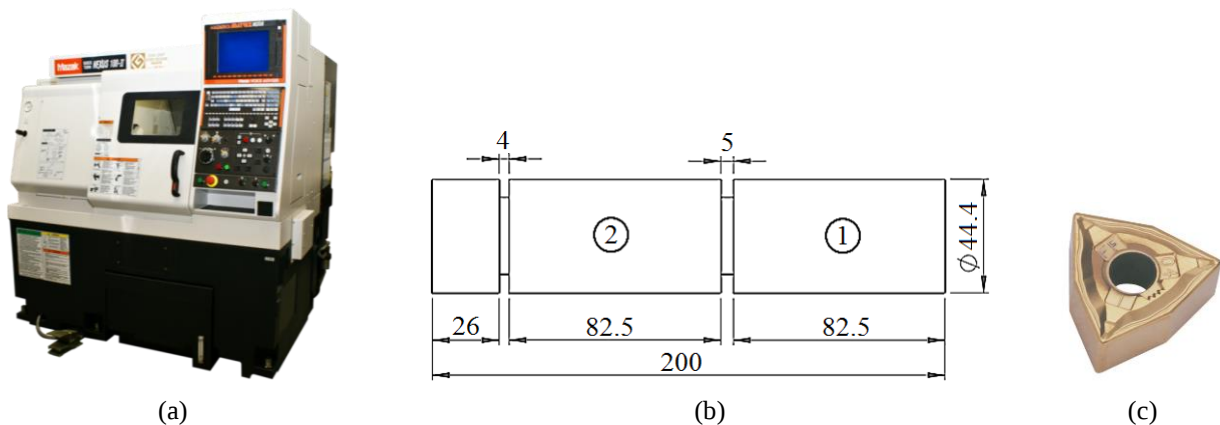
(a) Lathe CNC Mazak QTN 100-II; (b) AISI 420C workpiece; (c) carbide insert Seco WNMG.
